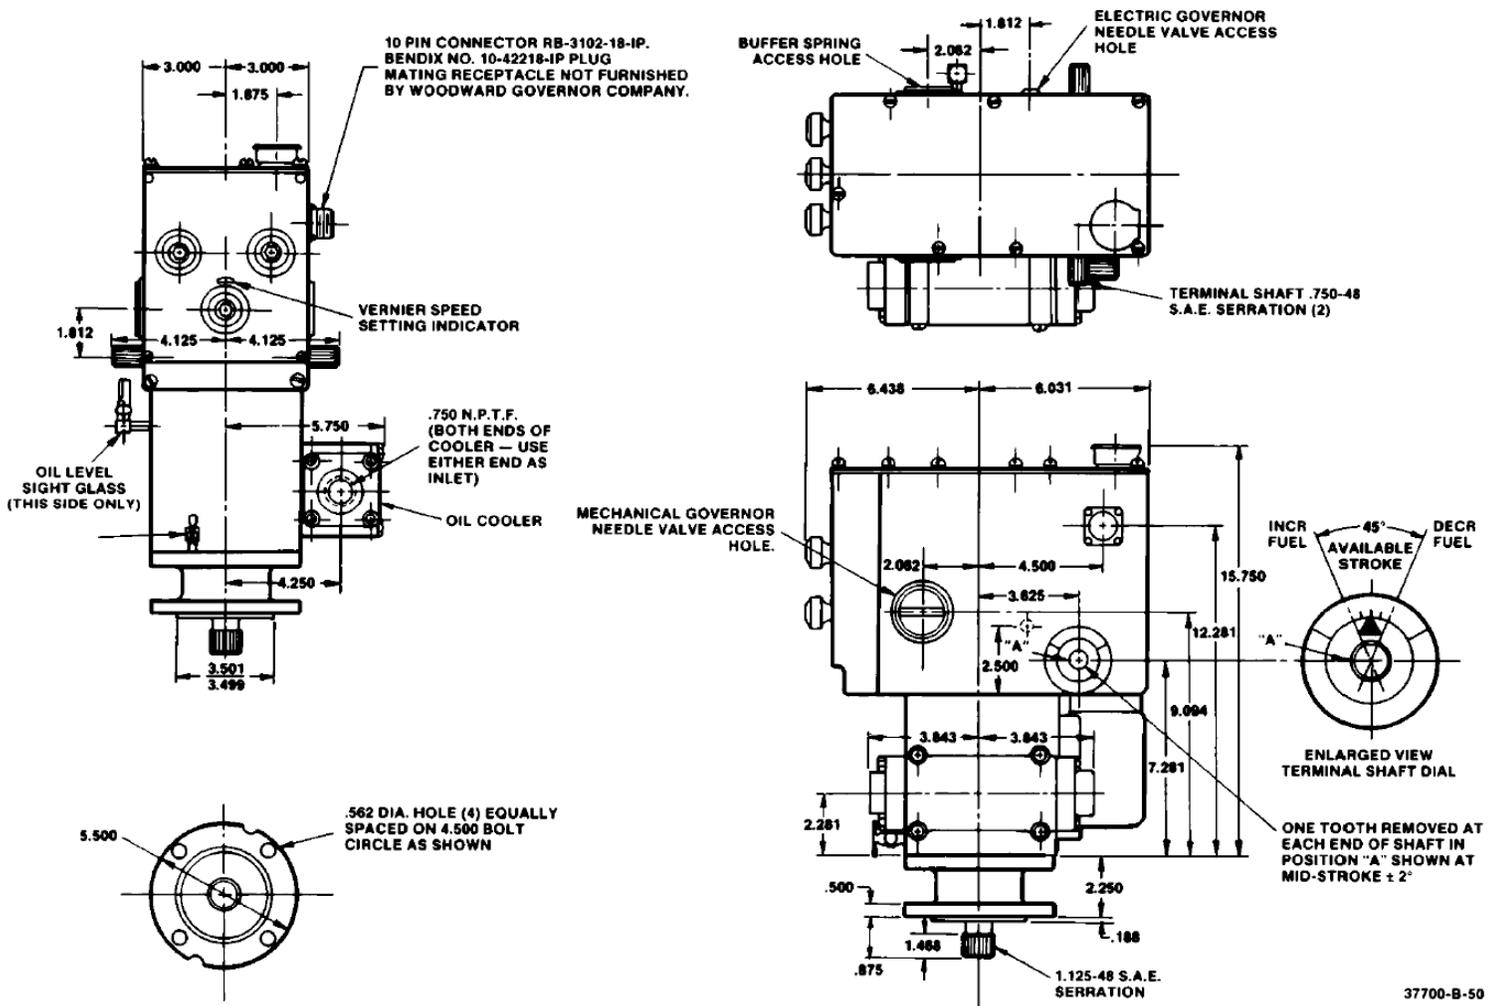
EGB-35P and 50P Exterior Dimensions
